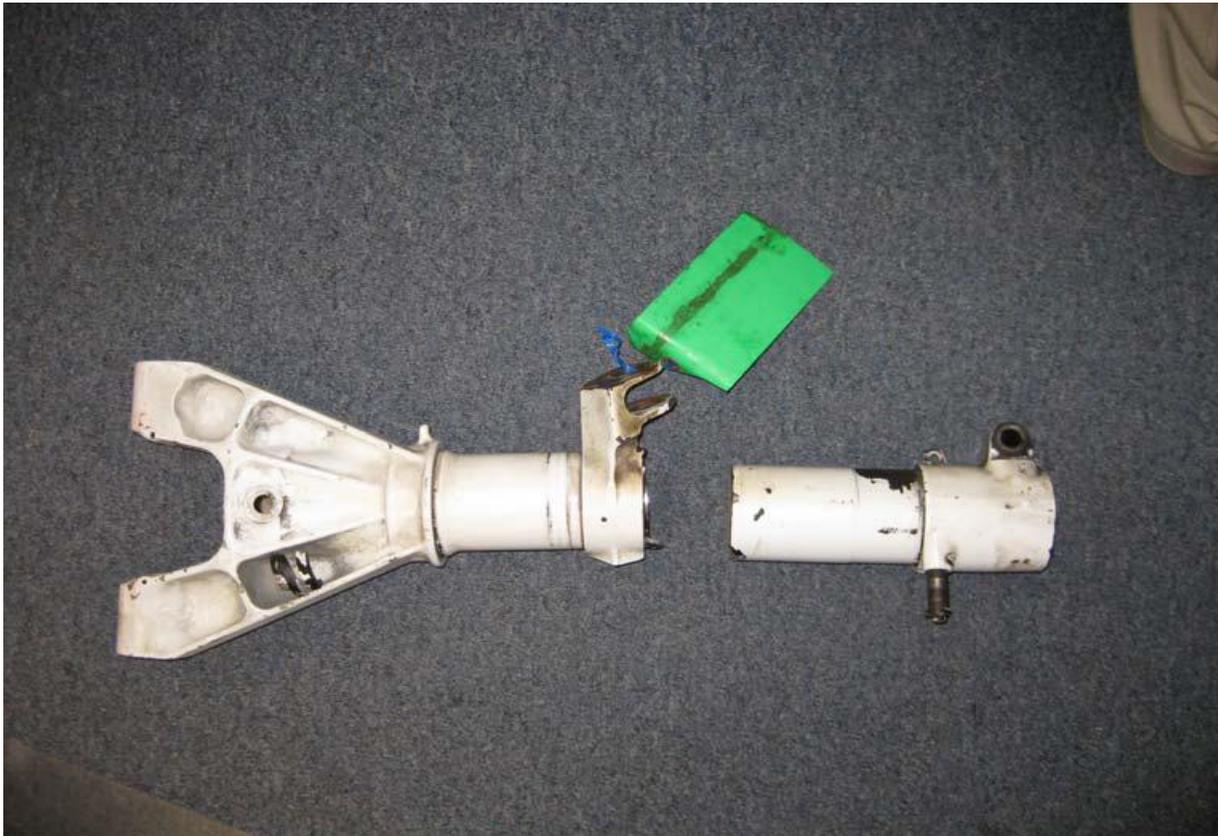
The same part removed from another airplane, illustrating a crack that may be found during an inspection.
